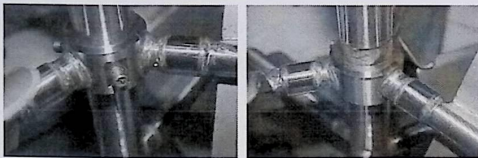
The hub is secured to the shaft by means of bolts with dome head nuts, which are exposed to product that may collect in and around the screw head. This non-welded hub-to-shaft joint also lacks a food grade gasket that could seal the dead spaces in the groove and avoid crevices at points of metal-to-metal contact. Ingress and accumulation of product and/or microorganisms at the inside are observed. Welds also have a high degree of roughness. Courtesy of Burggraaf & Partners B.V., www.burggraaf.cc.
